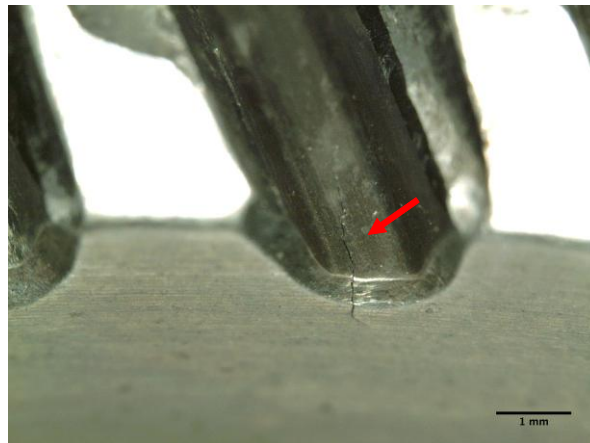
Close up view of an additional fatigue crack located at the root of the bevel gear teeth
